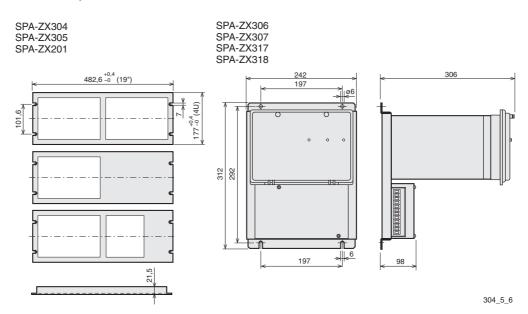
Mounting cabinets and frames as well as projecting mounting (dimensions in mm)
